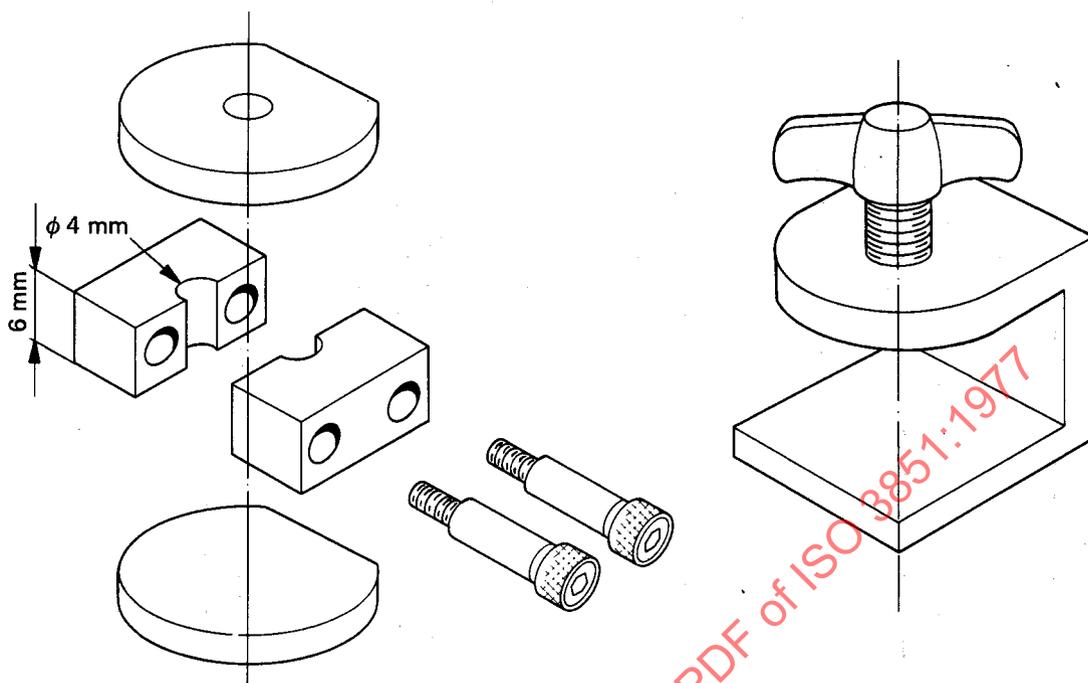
Mould and clamp for preparation of compressive test specimen
